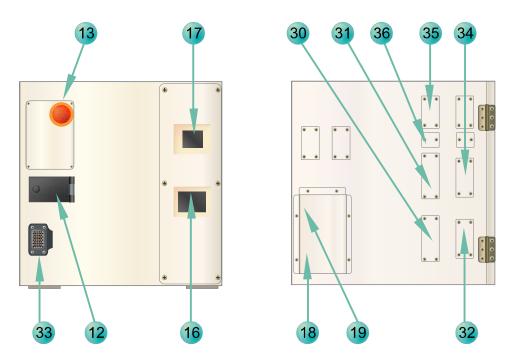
Part arrangement in the front and rear surfaces of the Hi5-C20 controller
